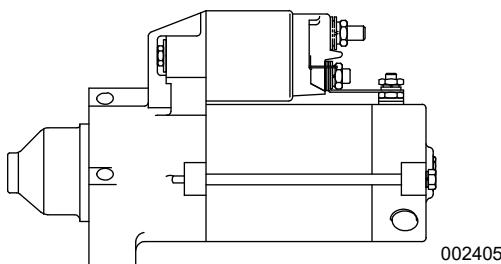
Starter Motor (V-Twins and units with 426cc and 460cc engines)
